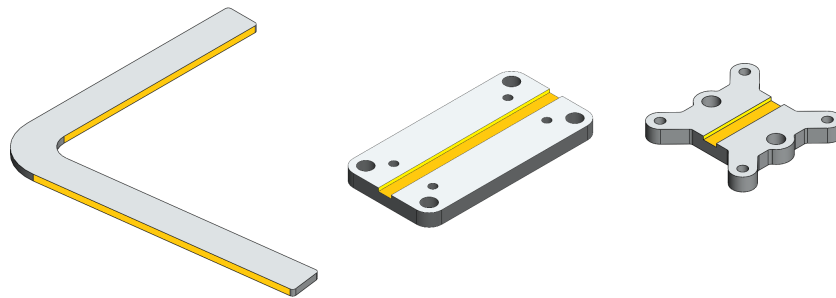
(Left) Test rig motor mount arm, (middle) rig joiner plate, and (right) rig motor plate that were cut on the water-jet machine. Surfaces that required additional machining through the mills are highlighted in yellow.
